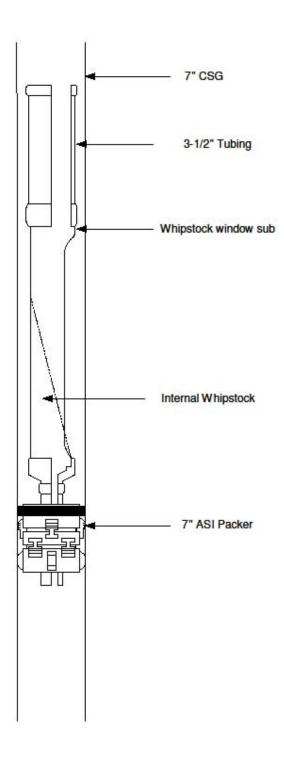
Standard Whipstock Assembly with Bent Sub & Cutting Tool
